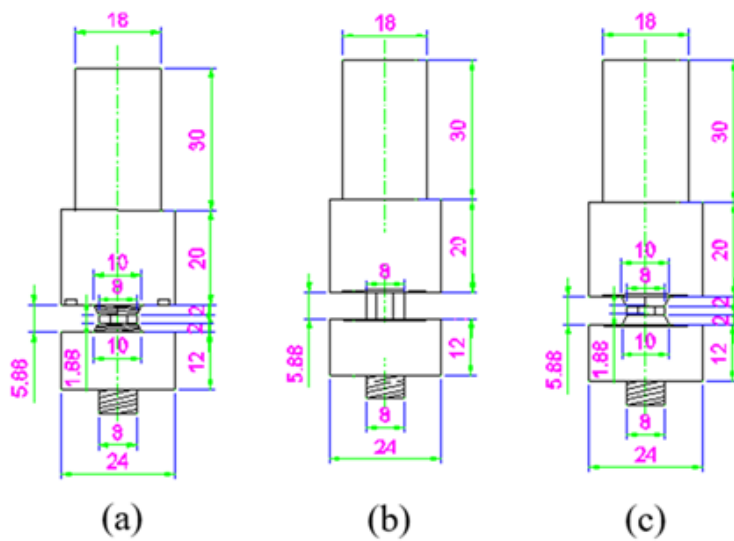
2D sketches, (a) Tool-5, (b) Tool-6, (c) Tool-7
